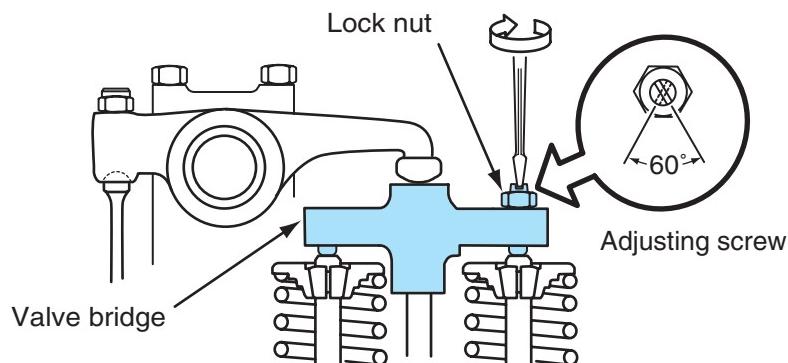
Adjusting a valve bridge/yoke assembly: the procedure on this engine is to bottom the adjusting screw, turn one flat, then torque the jam nut.
